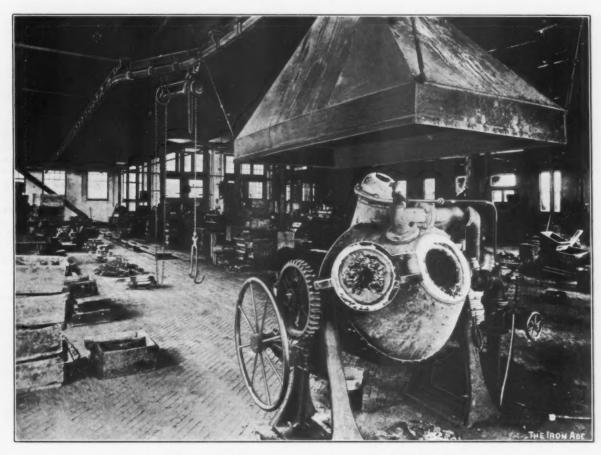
Interior of the Brass Foundry. One of Five Melting Furnaces.
